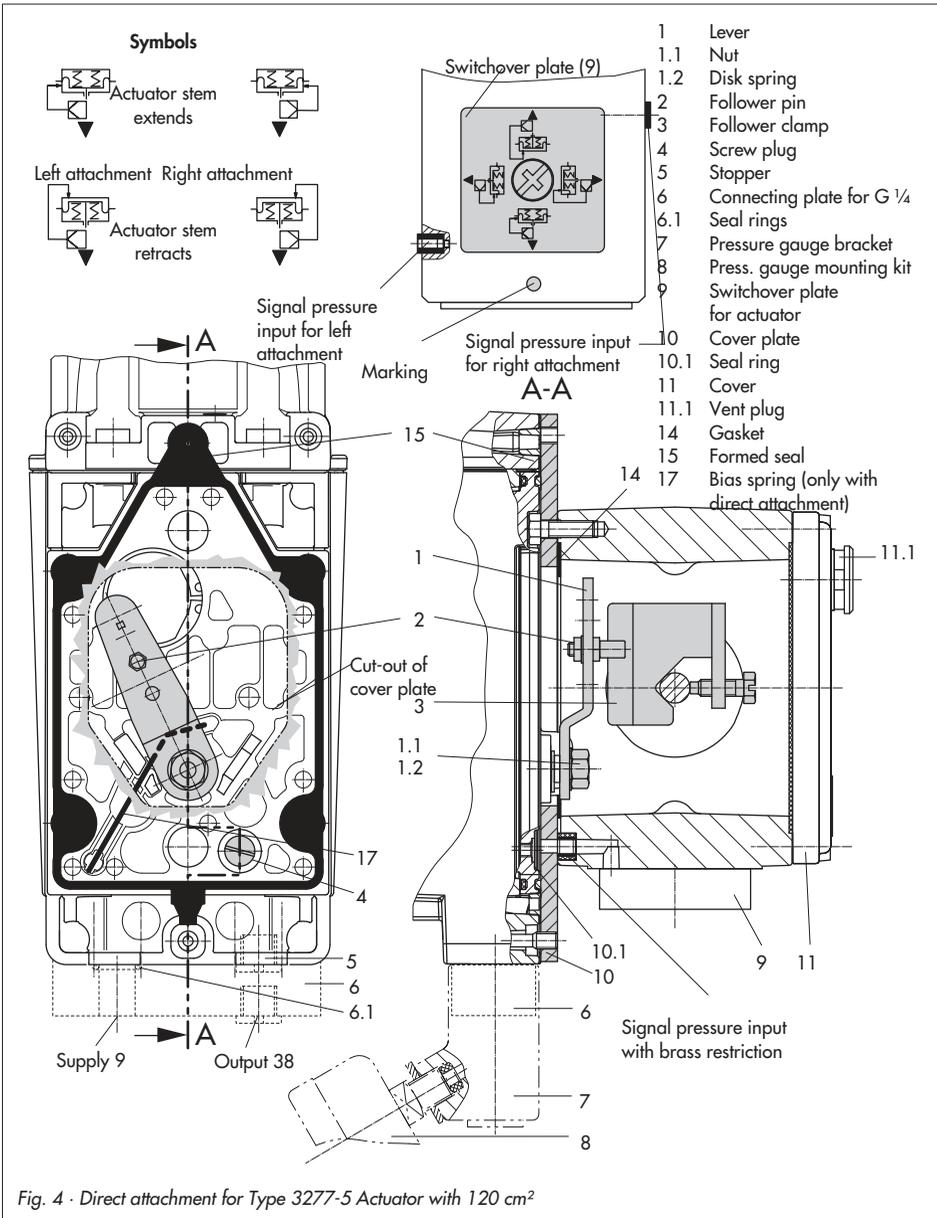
· Direct attachment for Type 3277-5 Actuator with 120 cm<sup>2</sup>
